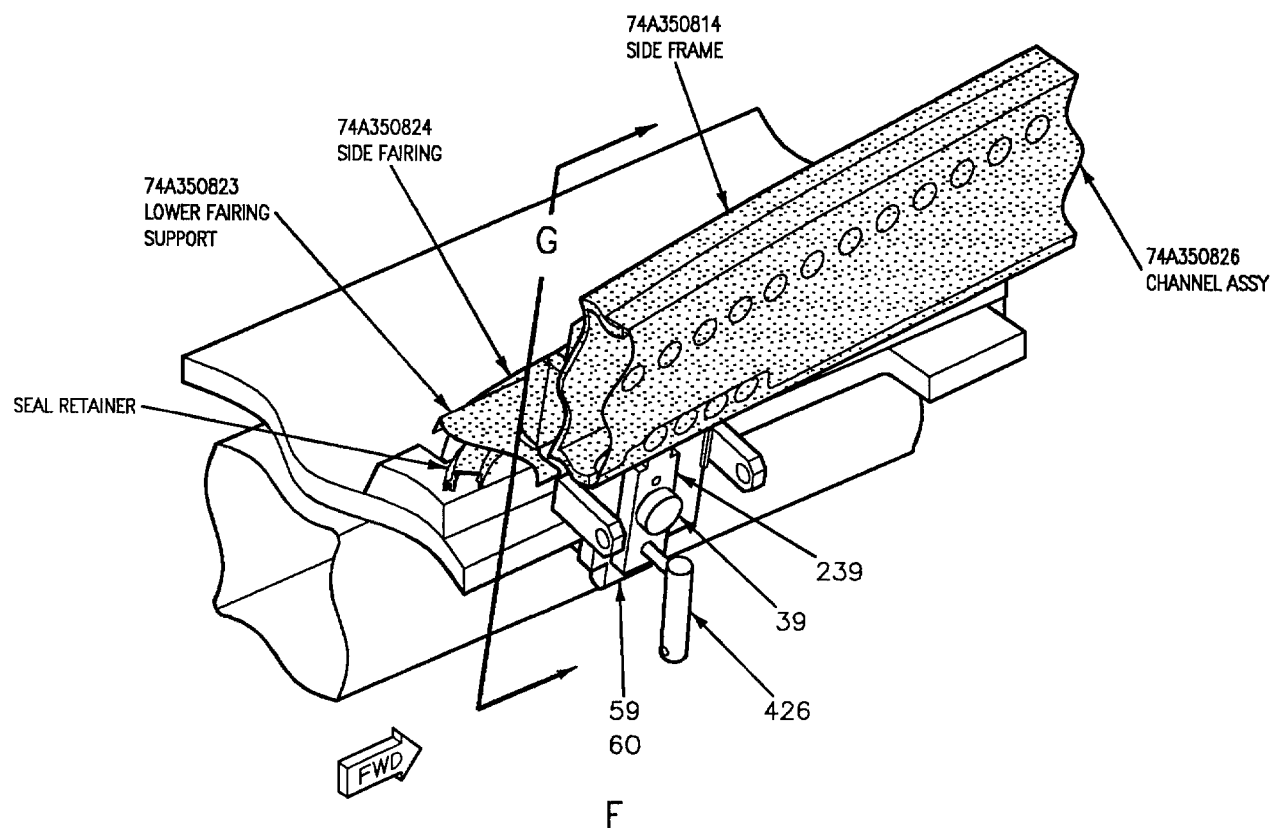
Replacement - Latch No. 6 (Sheet 4)
